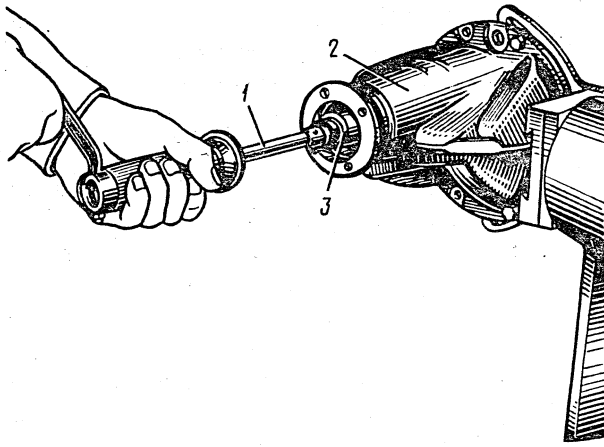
Checking the Preload of Drive Pinion Bearings:
